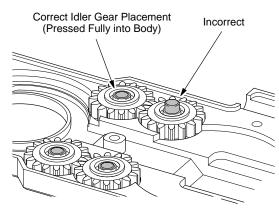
Correct Placement of Idler Gear in Micro Weld Head Housing
